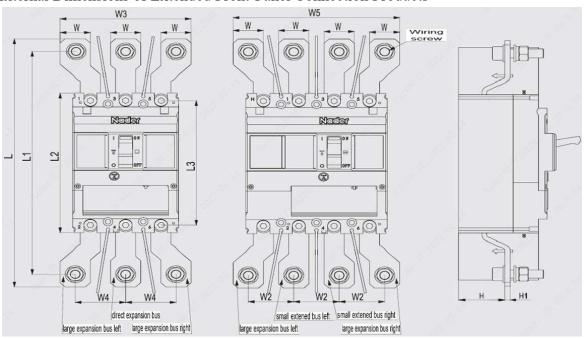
3P, 4P Outline and installation dimensions of expansion wiring in front of the board
